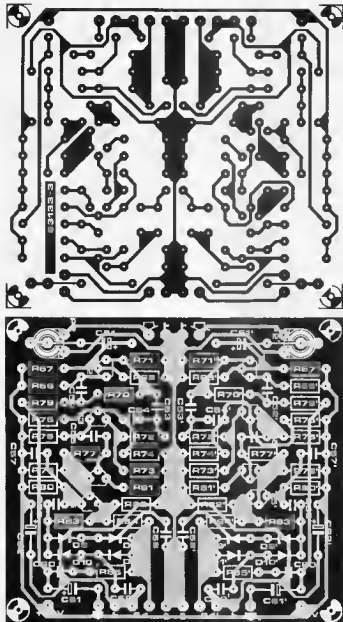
Layout and component side of the DNL board: as the DNL should be suitable for stereo, the board consists of two symmetrical halves.
